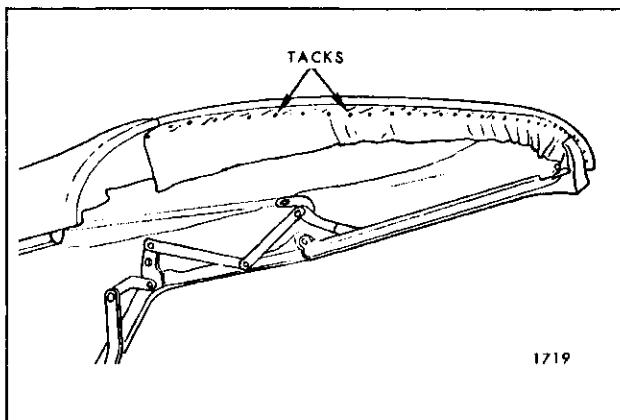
Installation Of Top Material To Front Roof Rail
